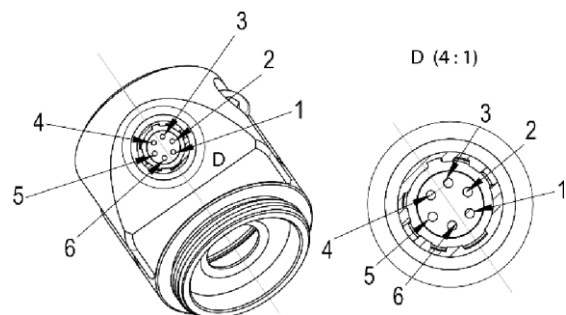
Mechanical drawing of the industrial C-mount EL-10-30-Ci (unit: mm).
